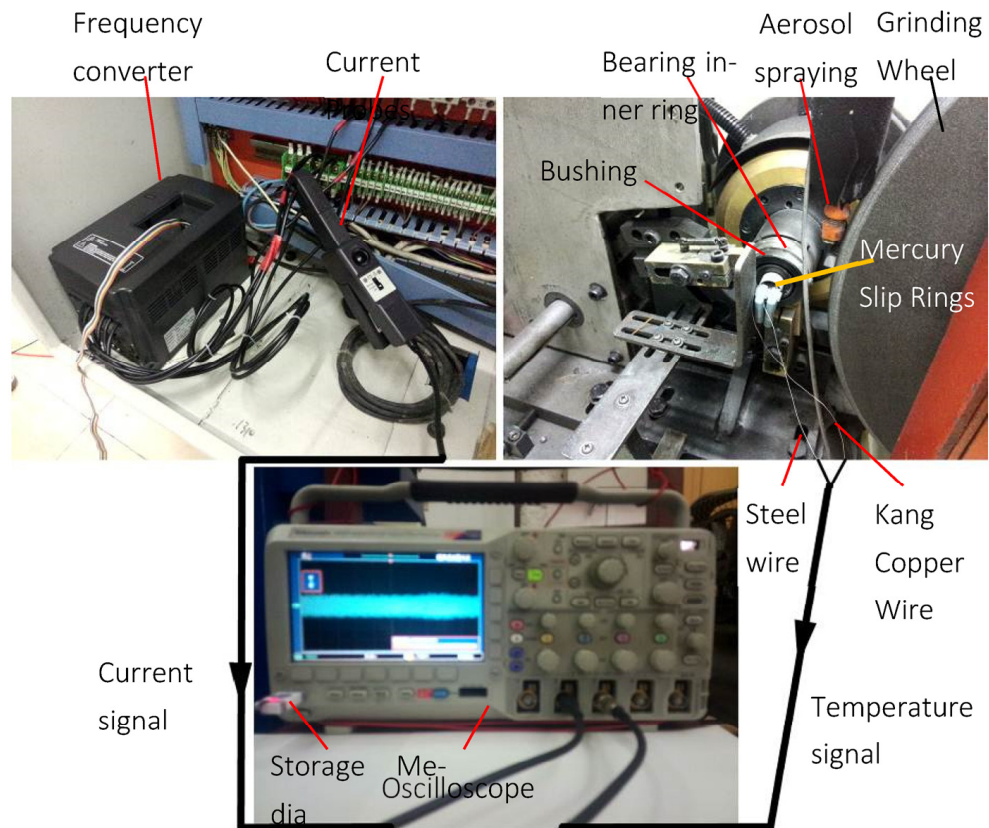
Bearing inner ring raceway low-temperature aerosol cooling lubrication grinding experiment.
